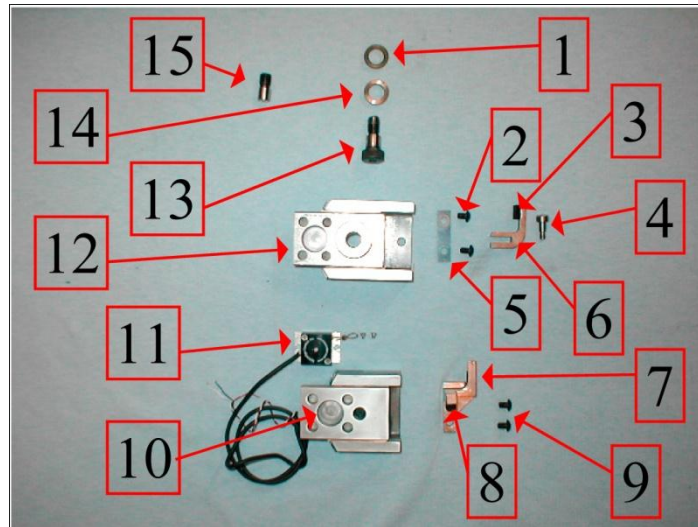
BALL SLIDER ASSEMBLY, EXPLODED VIEW
